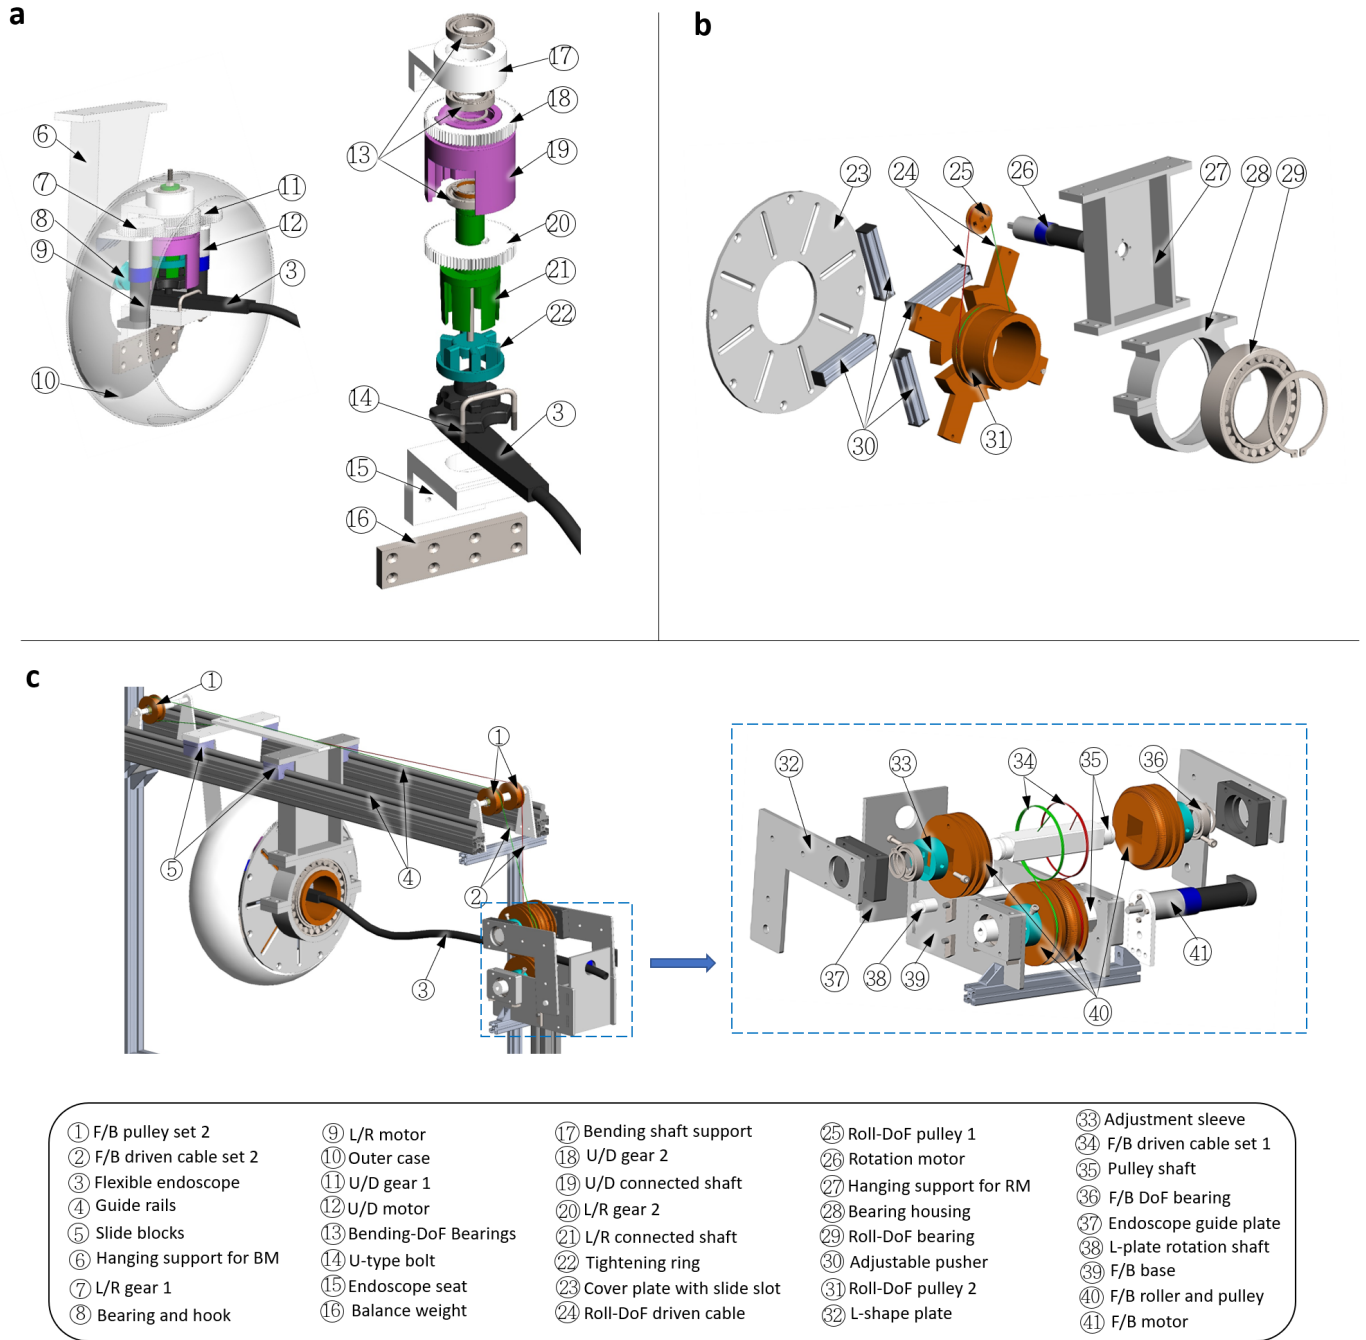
Slave robotic endoscope system. Exploded view of bending module (a), rotation module (b) and translation module (c).
